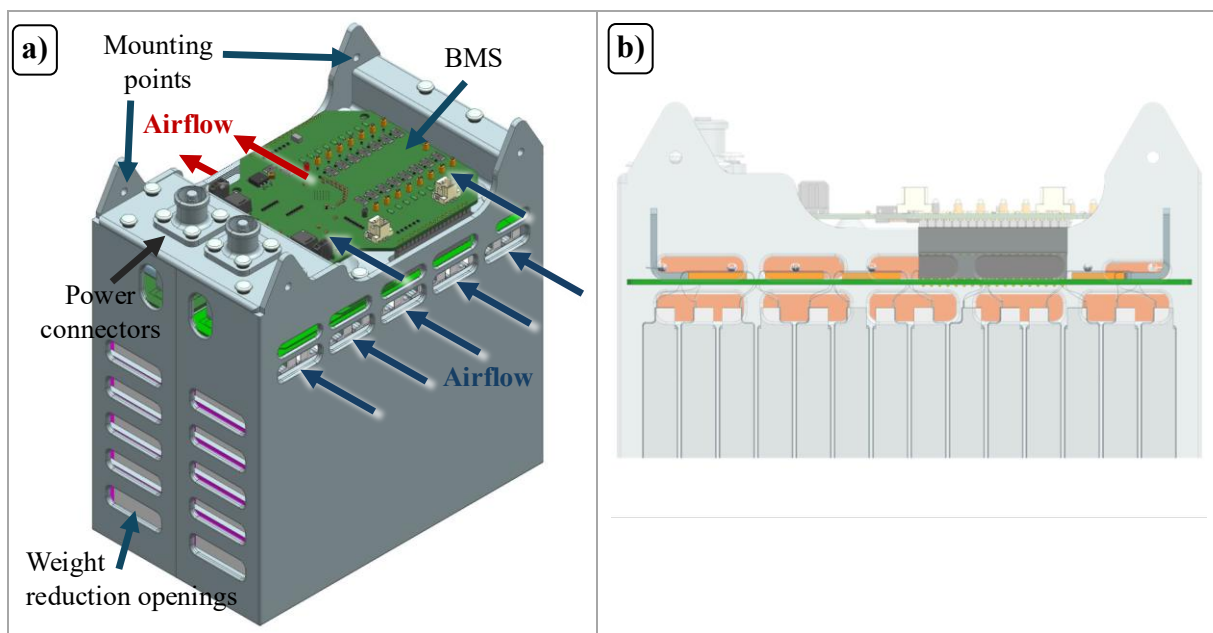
a) Final module CAD design, b) cooling ducts through the module (orange color)
